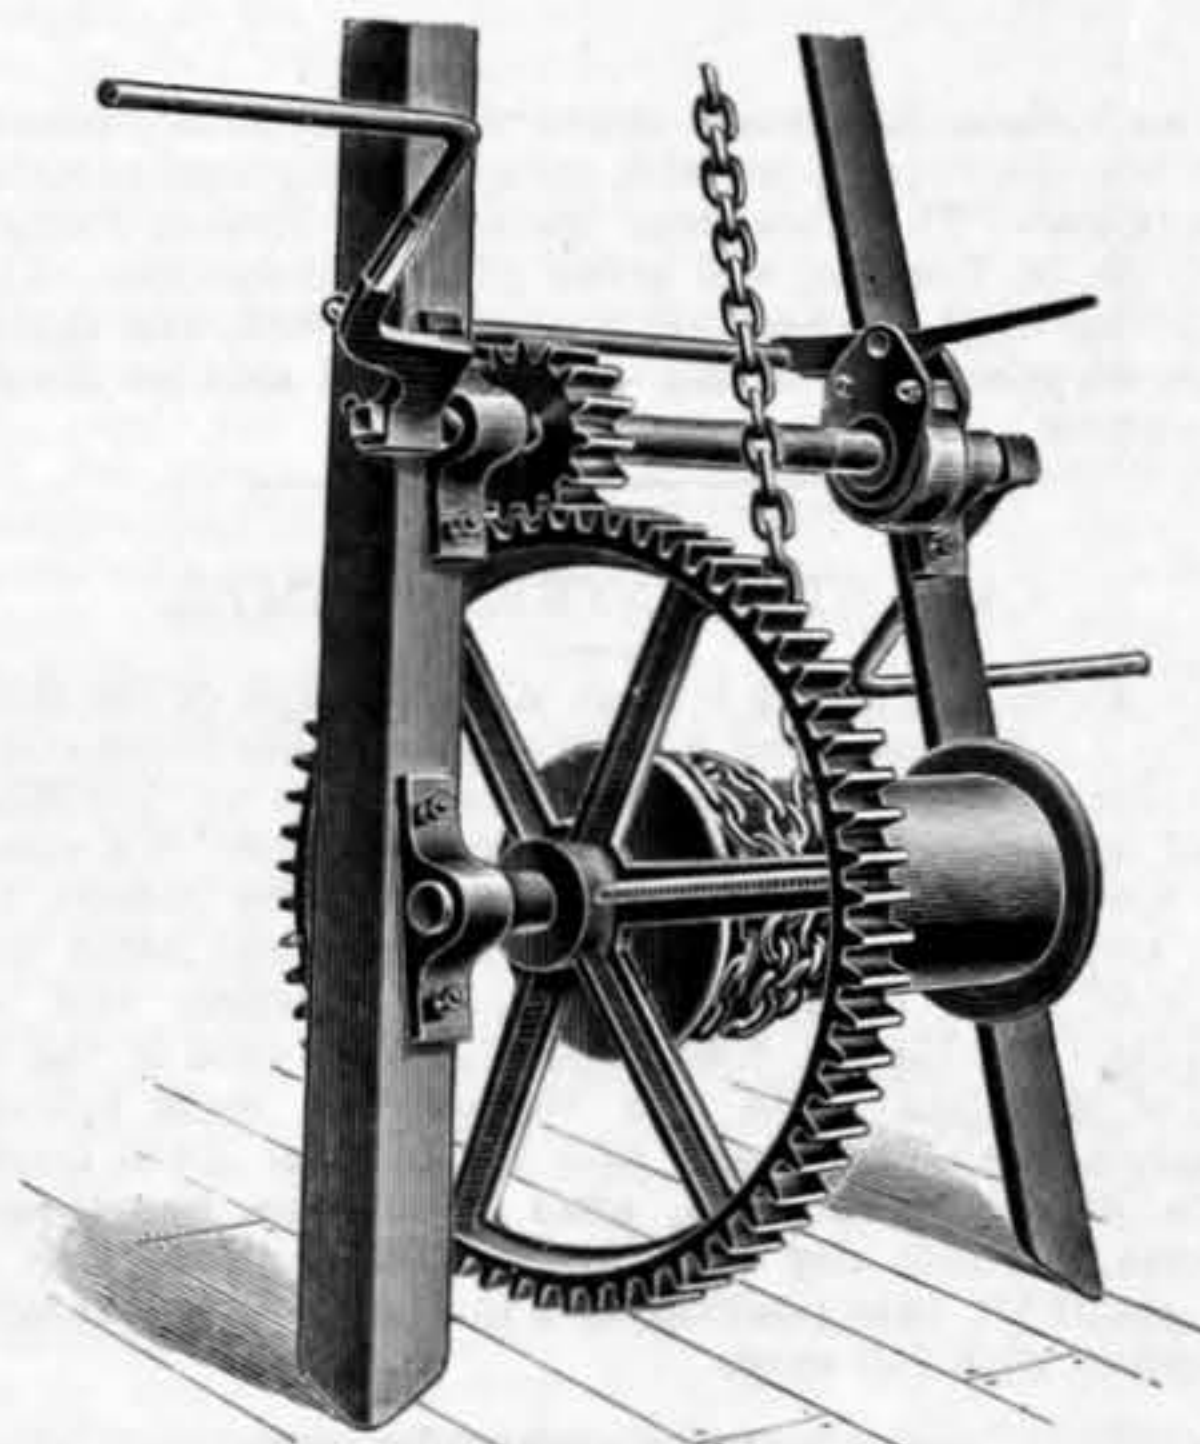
ENLARGED VIEW OF PART OF Fig. 2
